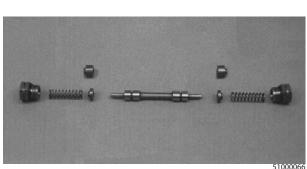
Loop Flushing Shuttle Valve Components
